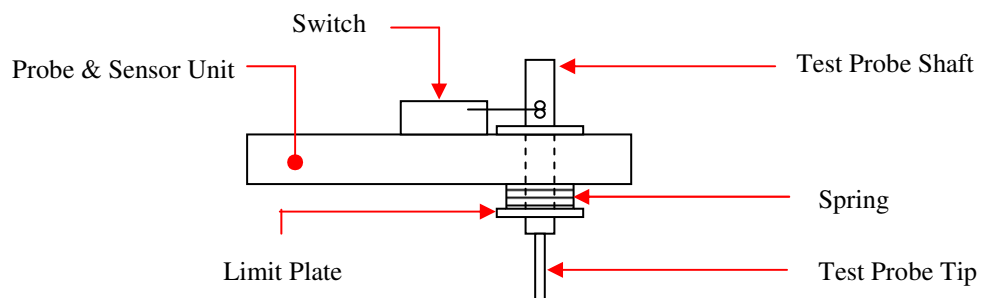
SKETCH OF MECHANICAL LINEAR SETUP [LEFT VIEW]
